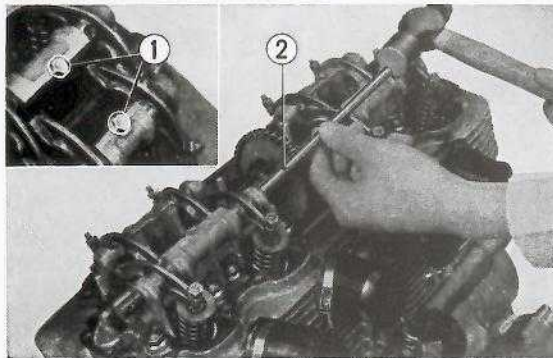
① Rocker arm shaft mounting bolts
